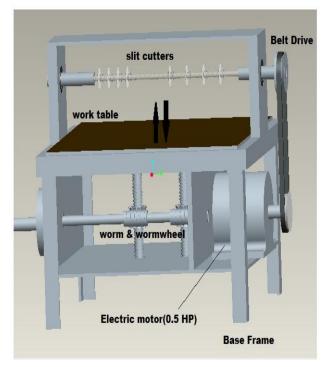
Switch board slot cutting machine using slit cutters The following table no 4. Shows the detailed parts of SCM machine
